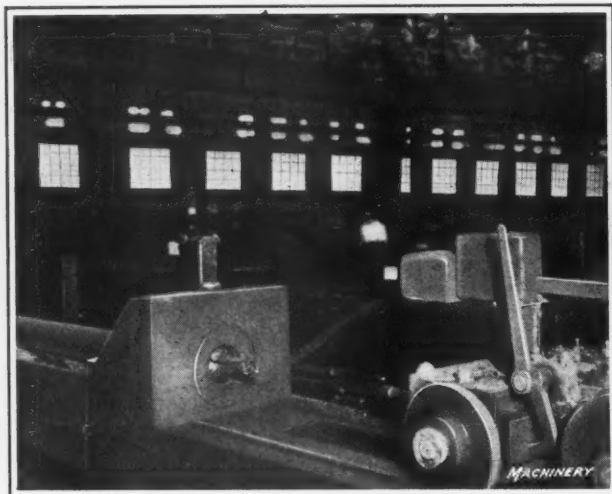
Pointed Tube projecting through the Die of a Draw-bench used for the Cold-drawing Operation
